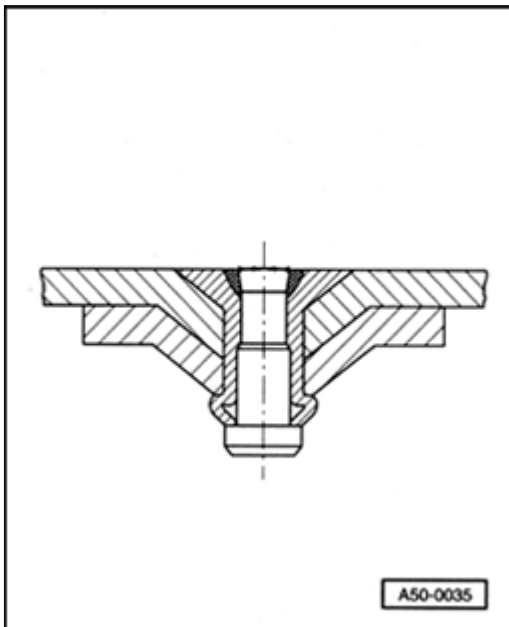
Installing Pop Rivet And Pulling Pin With Rivet Pliers
